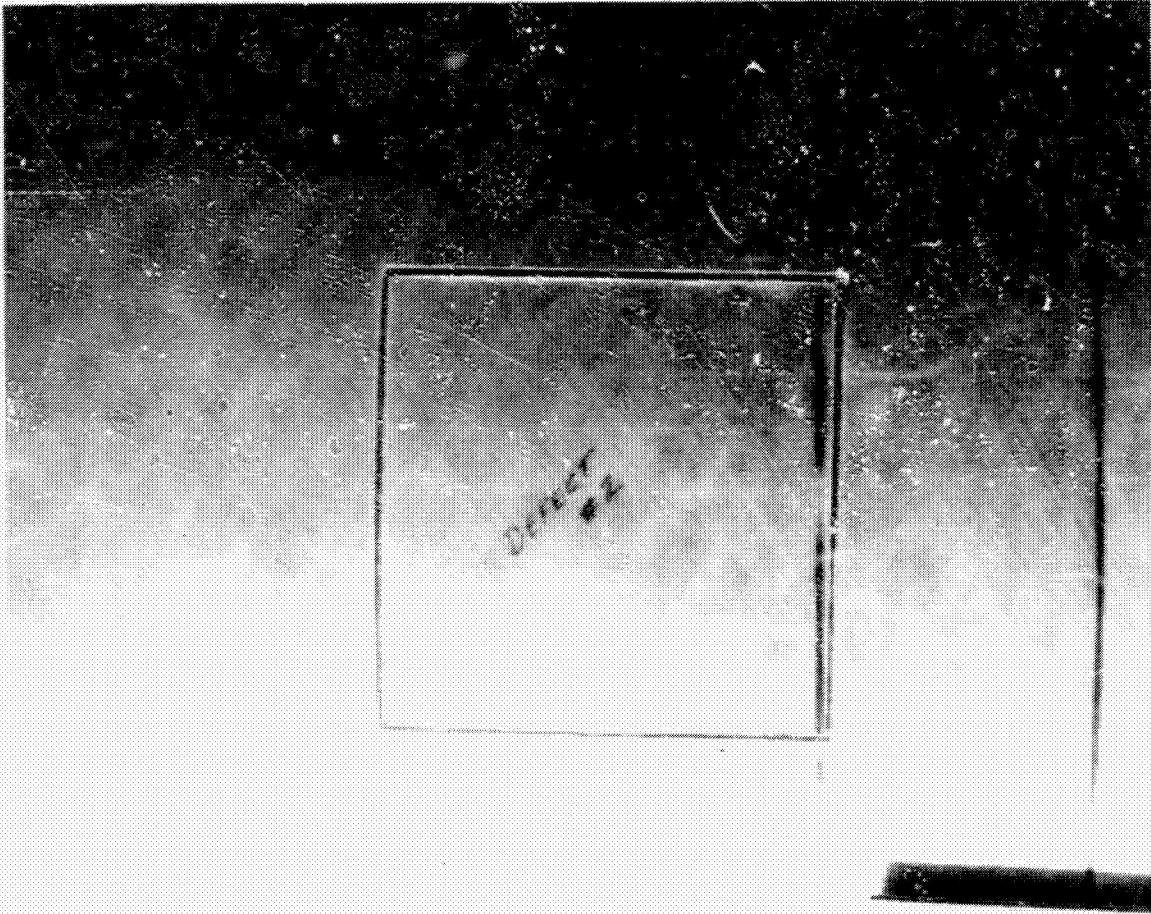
DEFECT NO. 2 MACHINED IN X248 A6 S/N NPP- 463
